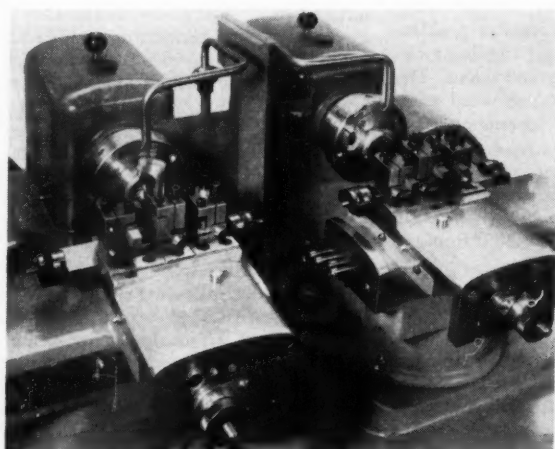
Semiautomatic lathe with turn spindles and toolheads
